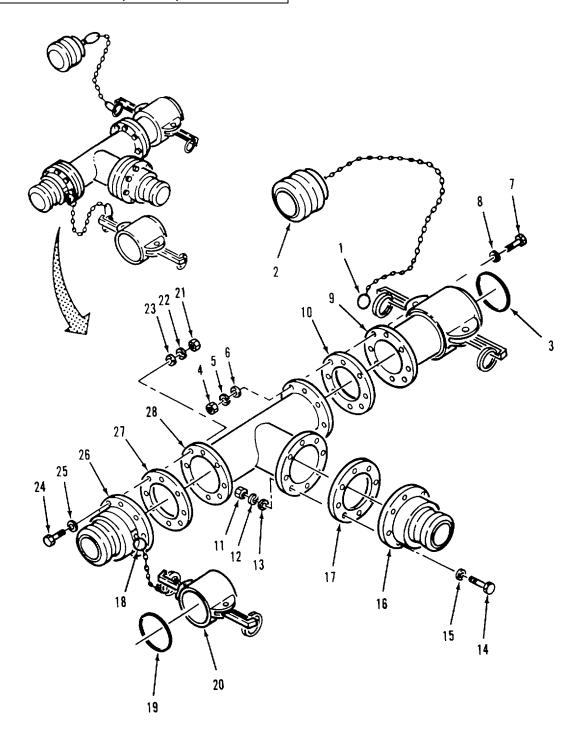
Tee Assembly (9117-Y1) Disassembly.
